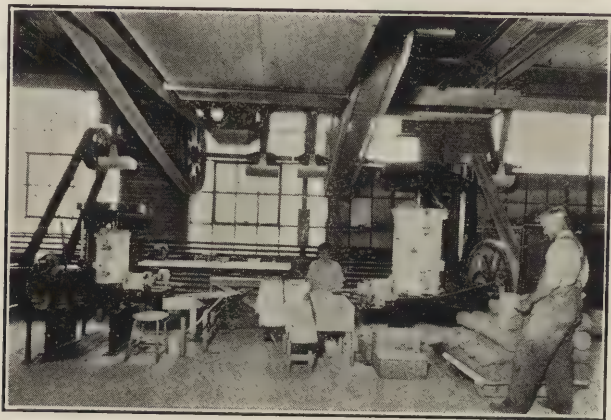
Process laboratory containing one full production size pug mill for blanks and one-half size.
